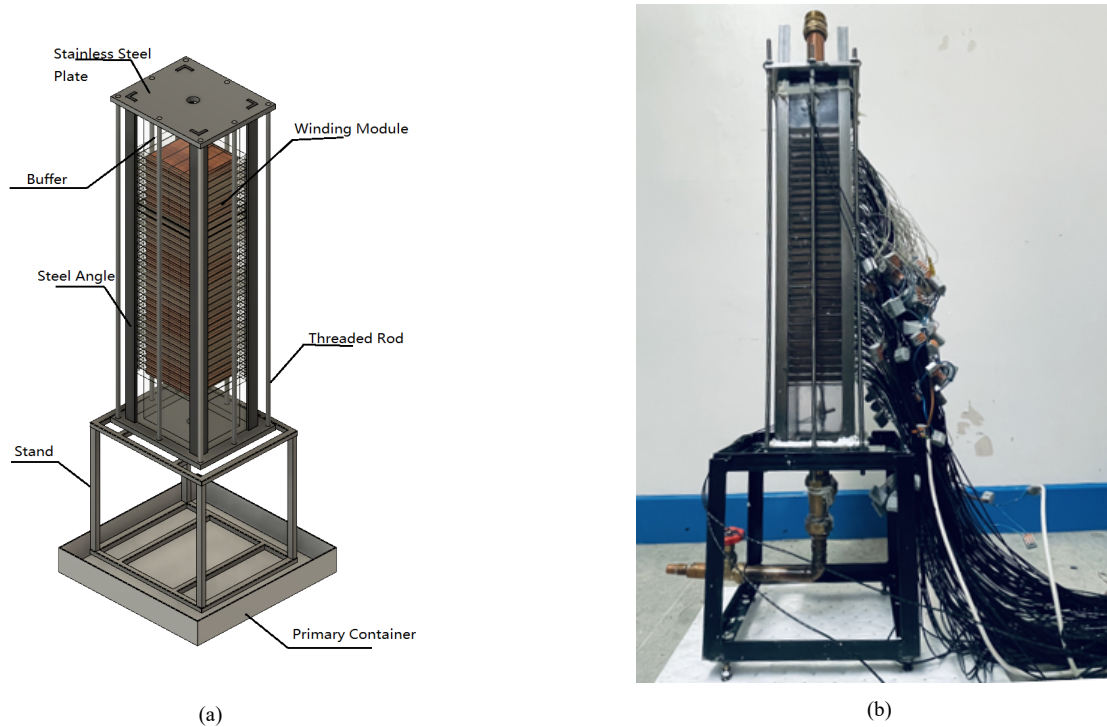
3D drawing and photo of modularised winding assembly (a) a 3D drawing (b) photo
